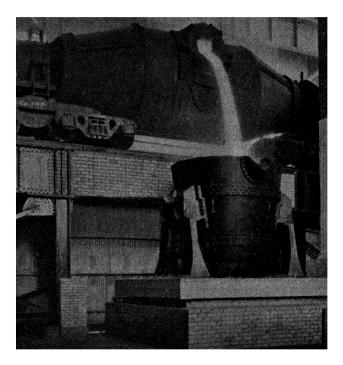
Hot metal transfer car and ladle. Pouring hot metal from a 175-ton brick-lined Pugh mixer ladle car into a 50-ton open-hearth transfer ladle standing on a scale. (By courtesy of the Iron and Steel Institute).
